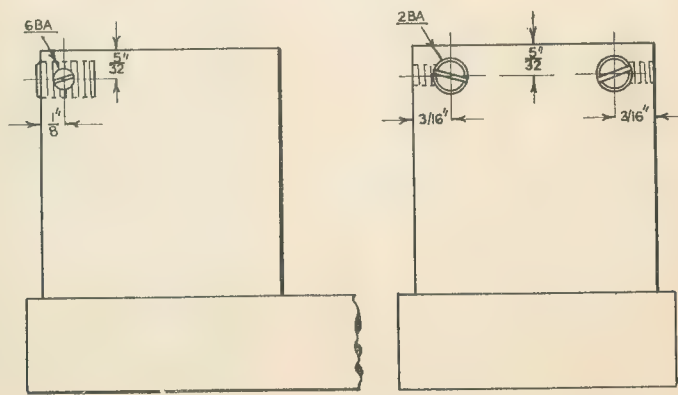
Showing the position of the adjusting-screws fitted to the base of the toolpost
